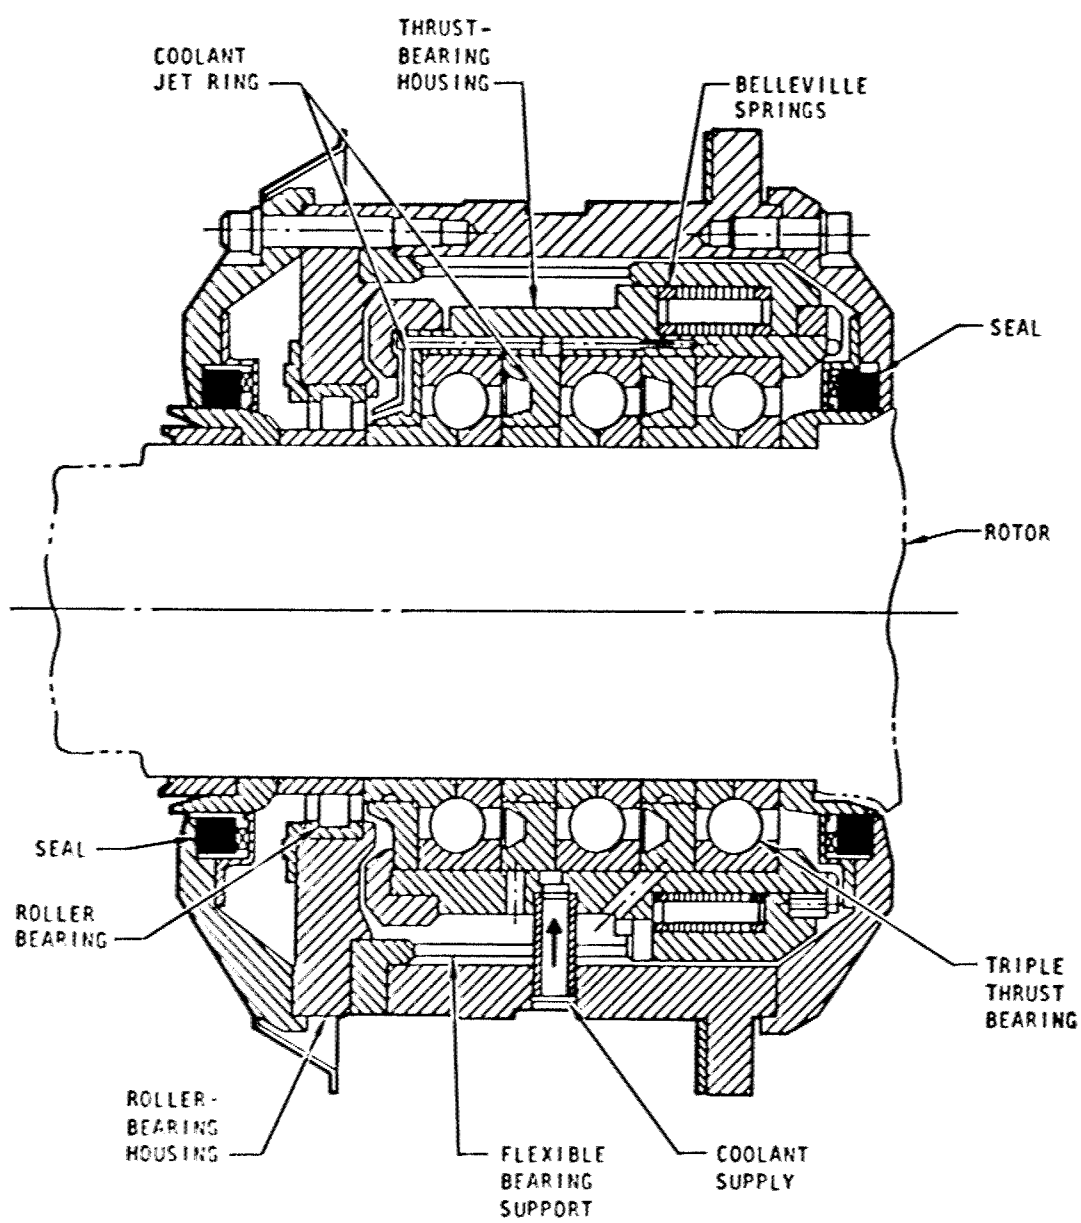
Thrust-bearing assembly on M1 fuel pump.
